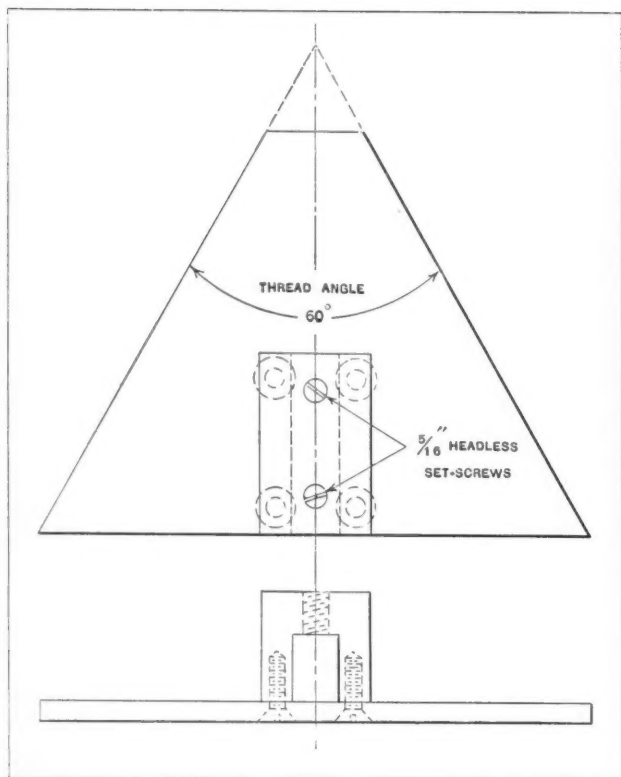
Templet Used in Grinding Threading Tool Having an Included Angle of 60 Degrees
